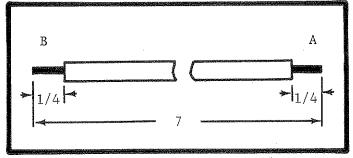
Dimensions for Cable #3 for Voltage Programing. Dimensions are in inches.
